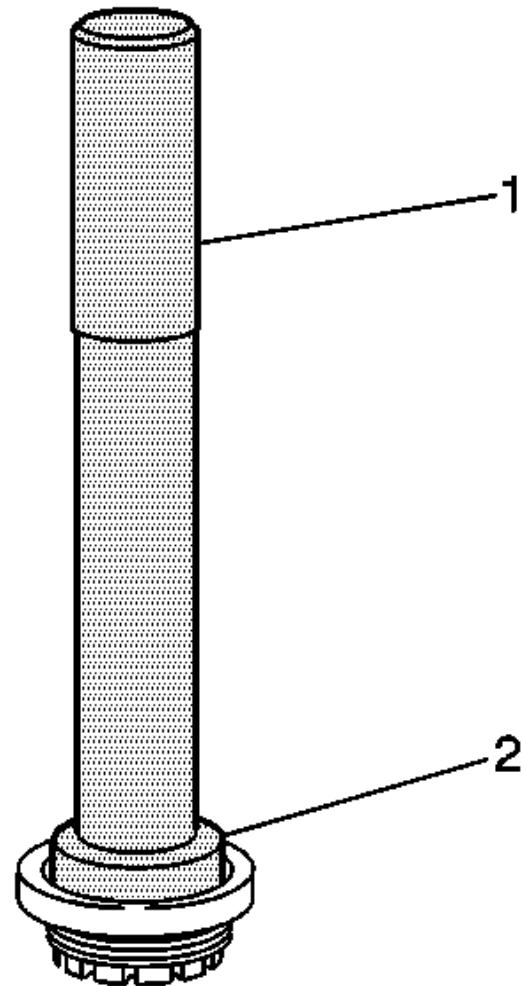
Bearings, Differential Adjuster Nut Sleeve And Installer
